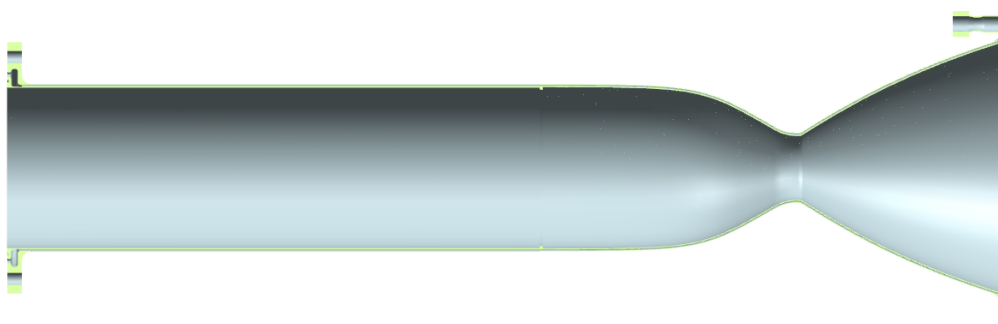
Section of of the combustion chamber nozzle, flange on the left hand side to be connected with head casing, right hand side is the ducted flange with oxidizer inlet
